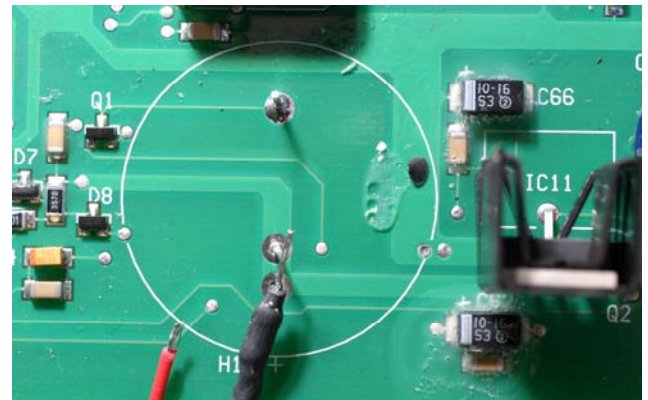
Solder the leads of the new device to the post revealed when the old unit is removed.
